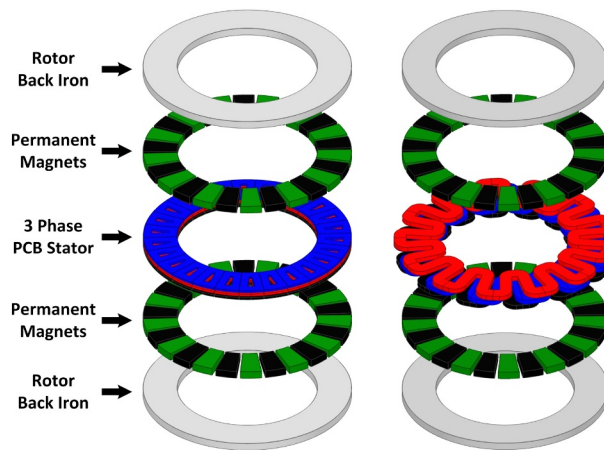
Exploded views of the 3D finite element analysis models of the example 26-pole, three-phase, double-rotor, single-stator coreless AFPM machine with spiral and wave printed circuit board stator windings are shown. The machine on the left side, with the more common spiral-shaped PCB coils is studied in this paper.
